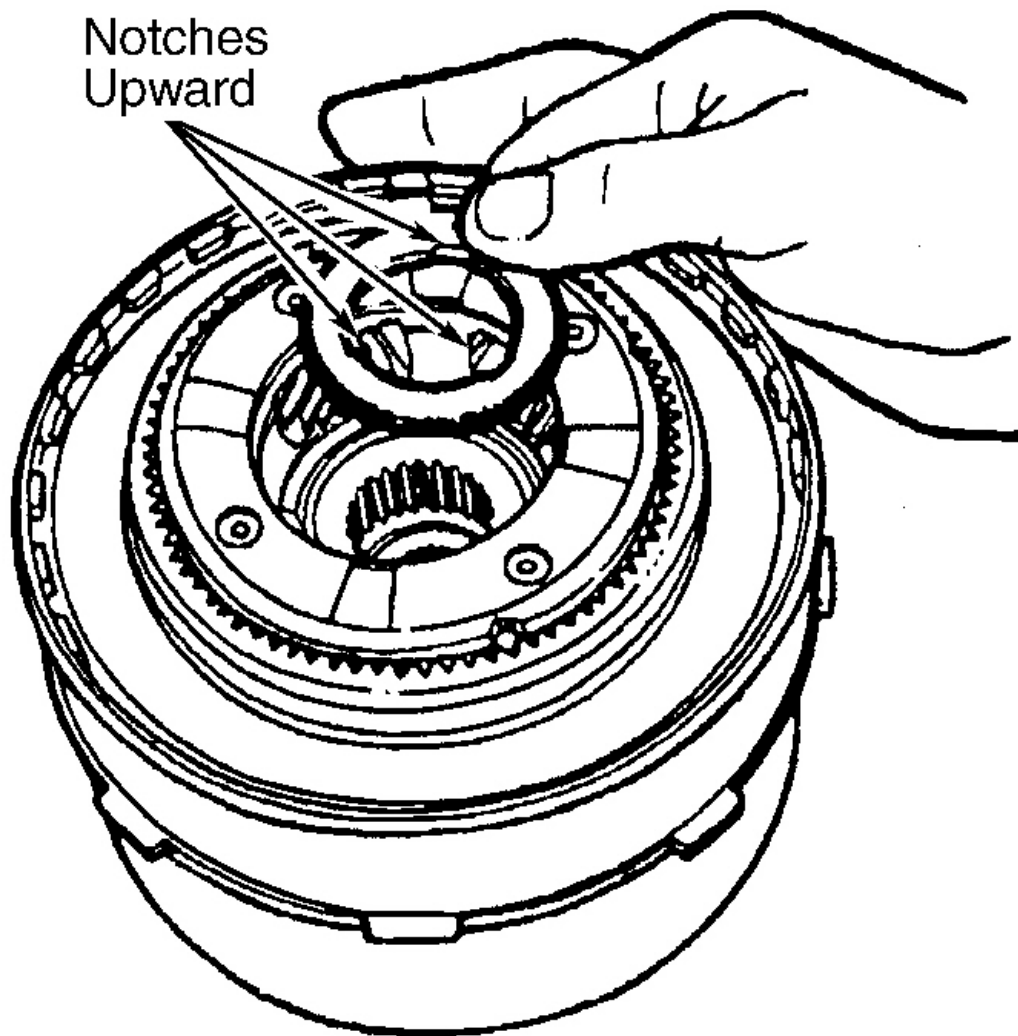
Installing Thrust Bearing No. 9A & Thrust Washer No. 8C
